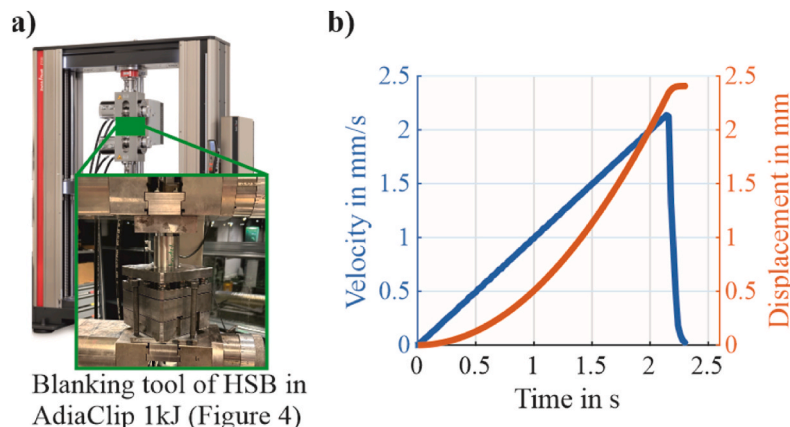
Slow-speed blanking process a) set up in a universal testing machine b) exemplary velocity profile.
